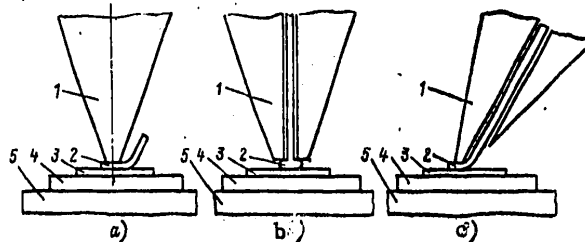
Thermal compression tool, a -- wedge; b -- capillary; c -- "bird's beak"; 1 -- tool; 2 -- joined wire; 3 -- joined area; 4 -- substrate; 5 -- welder table.
